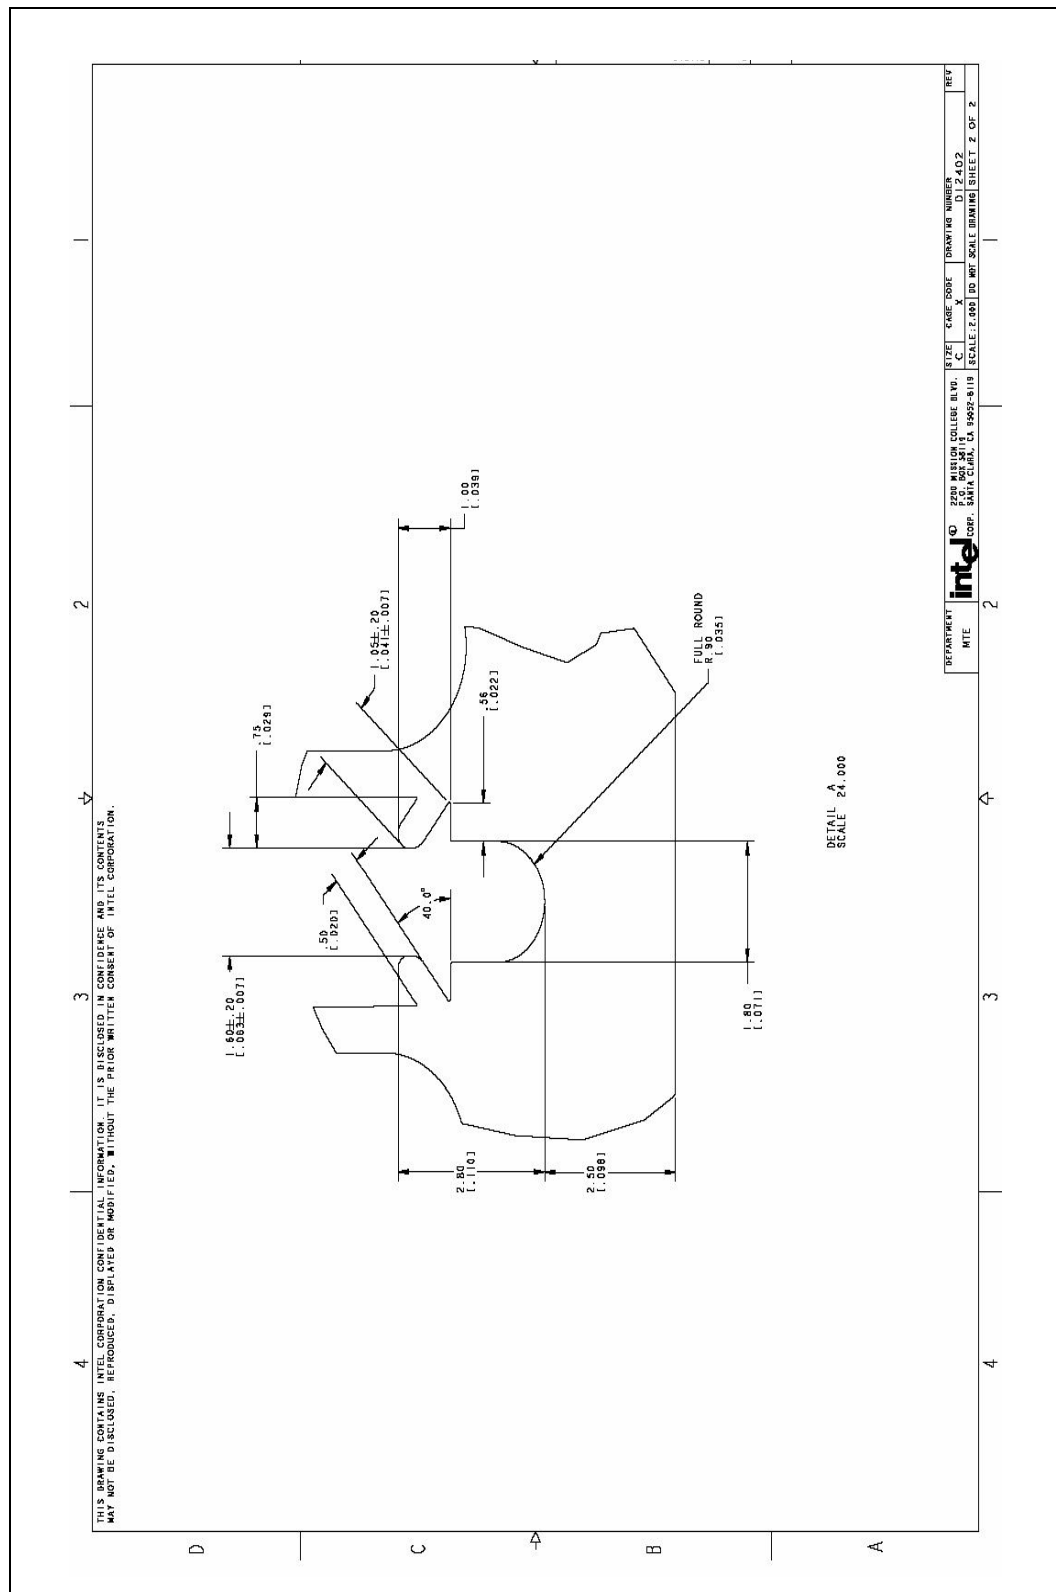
Tall Torsional Clip Heatsink Drawing (Sheet 2 of 2)
